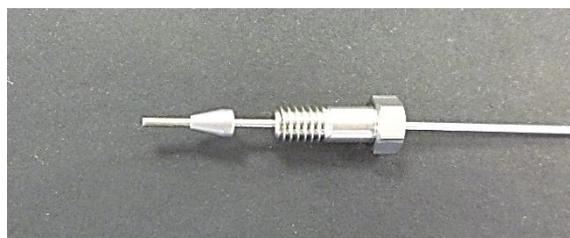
Assembly of 1/32" OD tubing with stainless steel nut and ferrule for 1/32" receiving ports
